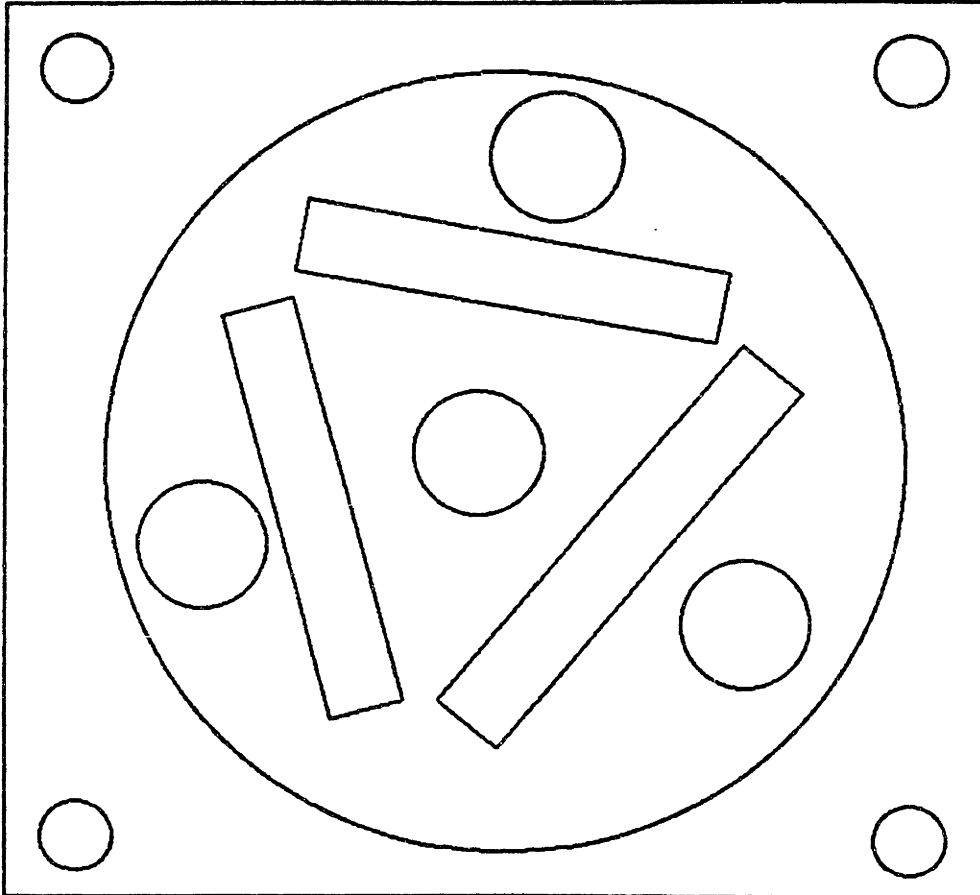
Semi-automatic polishing design. This rigid plate is mounted atop a polishing wheel and attached to the polishing table by stainless steel shafts.
